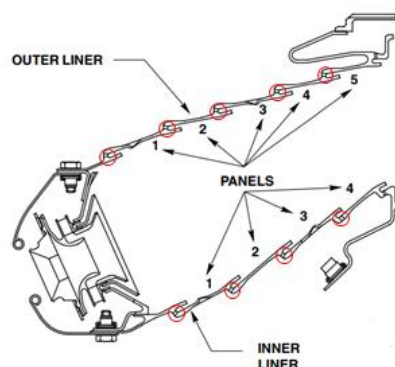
Position of the slots of machined rings in the CFM56-3 combustion chamber, adapted from [116].
